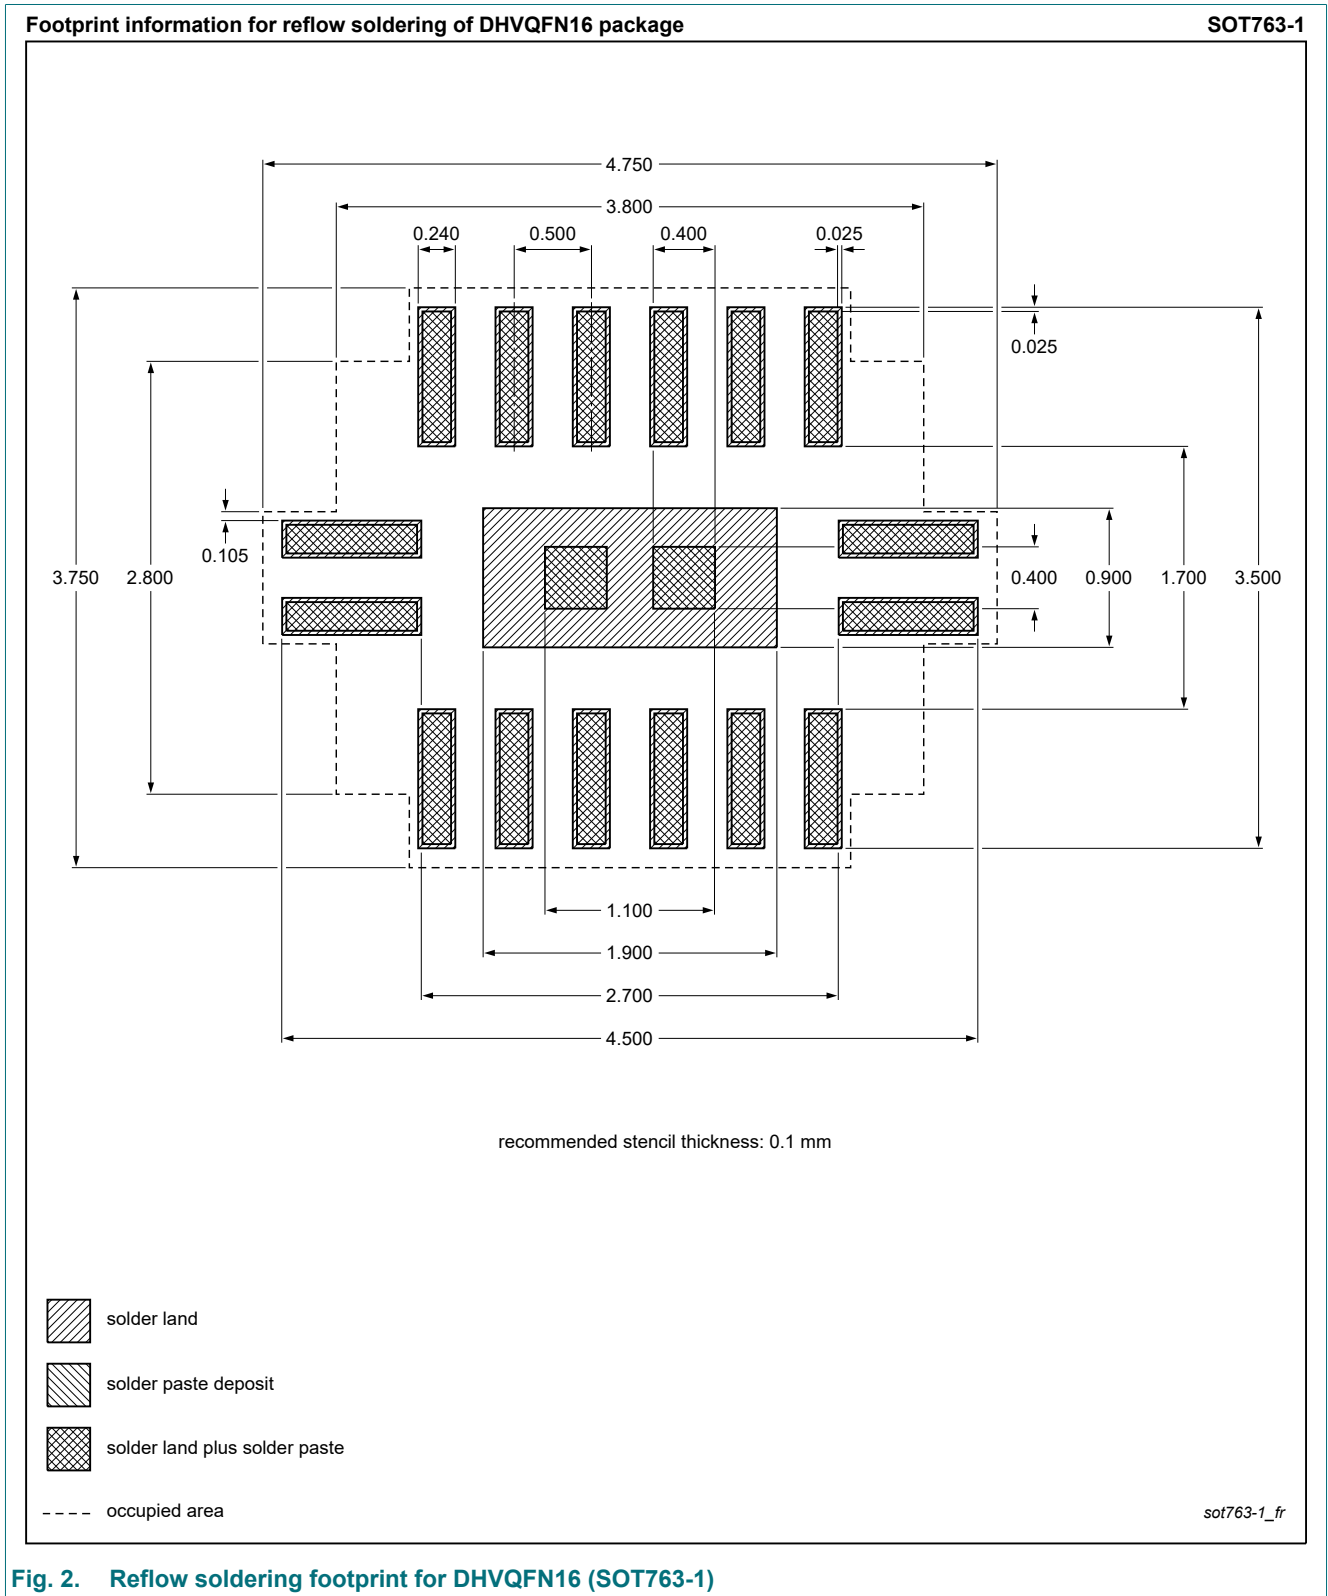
Reflow soldering footprint for DHVQFN16 (SOT763-1)
